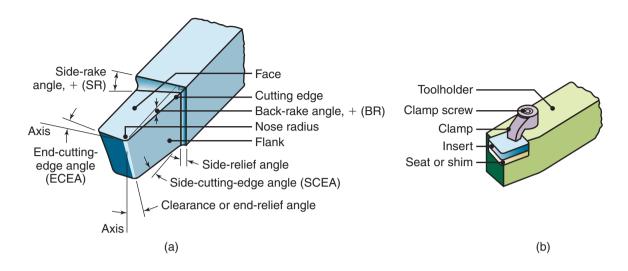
(a) Schematic illustration of a right-hand cutting tool. The various angles on these tools and their effects on machining are described in Section 23.2. Although these tools traditionally have been produced from solid-tool steel bars, they have been replaced largely with (b) inserts, typically made of carbides and other materials; they are available in a wide variety of shapes and sizes.
